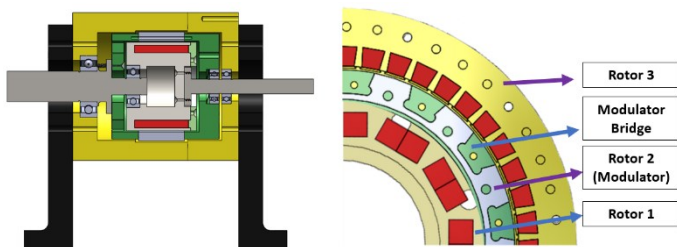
Mechanical and electromagnetic design cross-sections of the second coaxial magnetic gear prototype.
